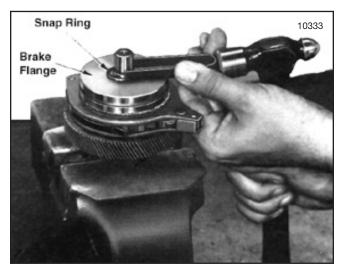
Removing Snap Ring from Load Brake Shaft
